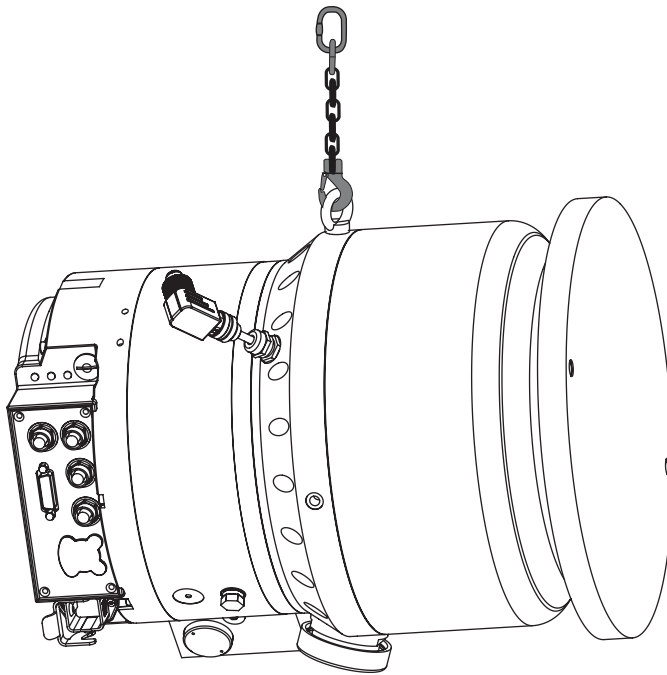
Slings points for horizontal transport of the turbopump without packaging
